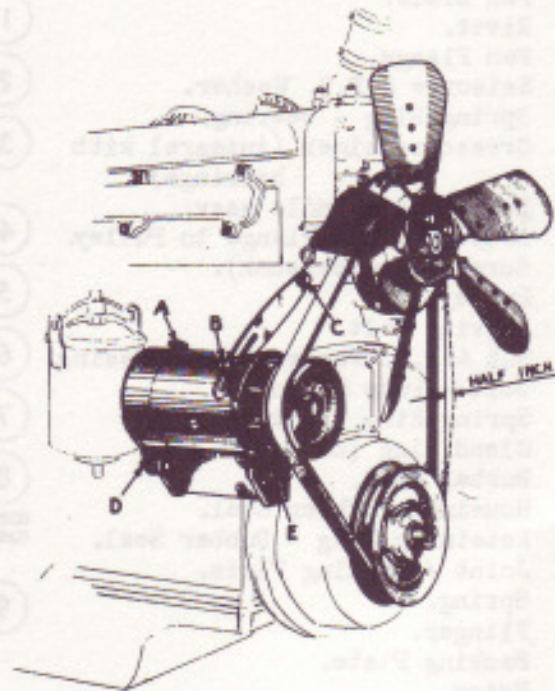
FAN, DYNAMO AND "V" BELT DRIVE.
